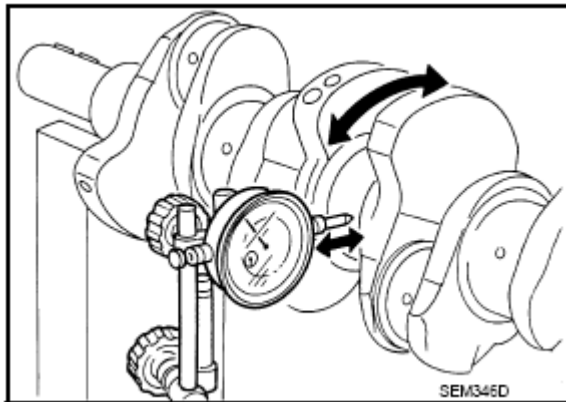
Checking Crankshaft Runout Using Dial Indicator
